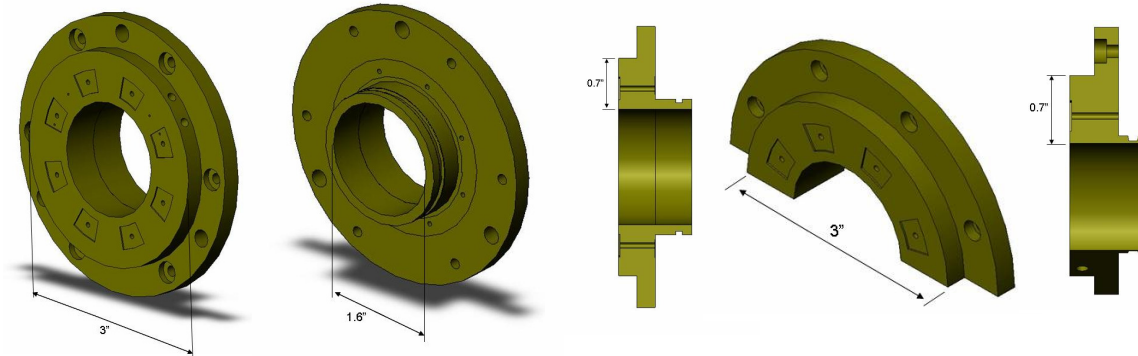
Depiction of test thrust bearing (front and back sides, cross-section) shown on left and of (half) slave thrust bearing show on right
